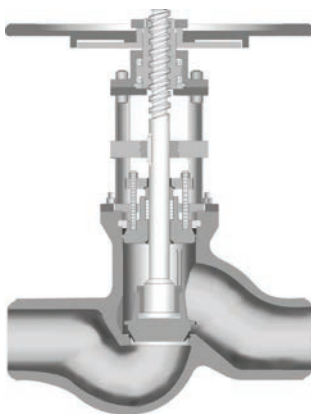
B Globe, Butt Weld Ends
